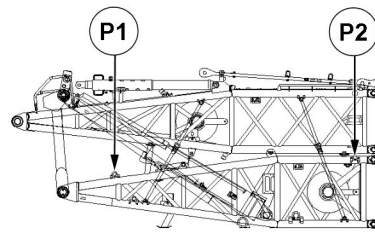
WA-frame 1 pivot section and WA-frame 2 pivot section unit fastening points
